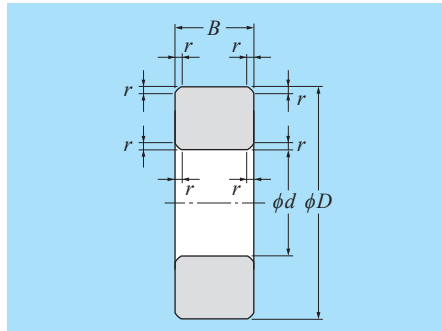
Radial bearings (excluding tapered roller bearings)
